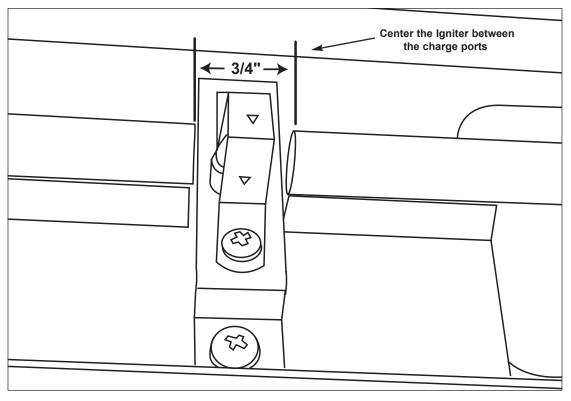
Igniter Module and Gas Charge Tube Assembly
